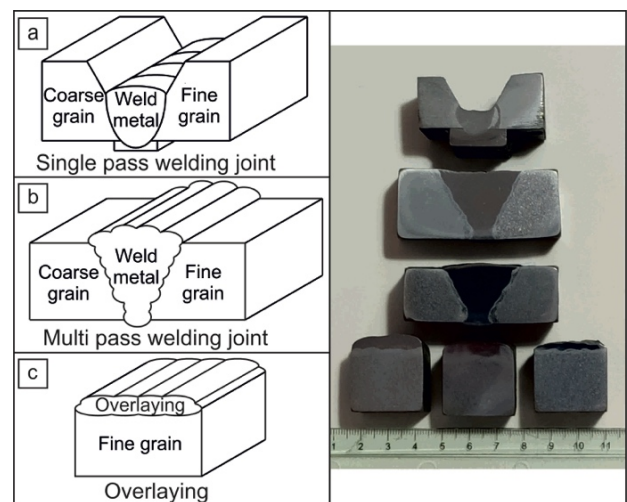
Schemes of single/multi-pass welded joints with different grain size sides and overlaid plates
